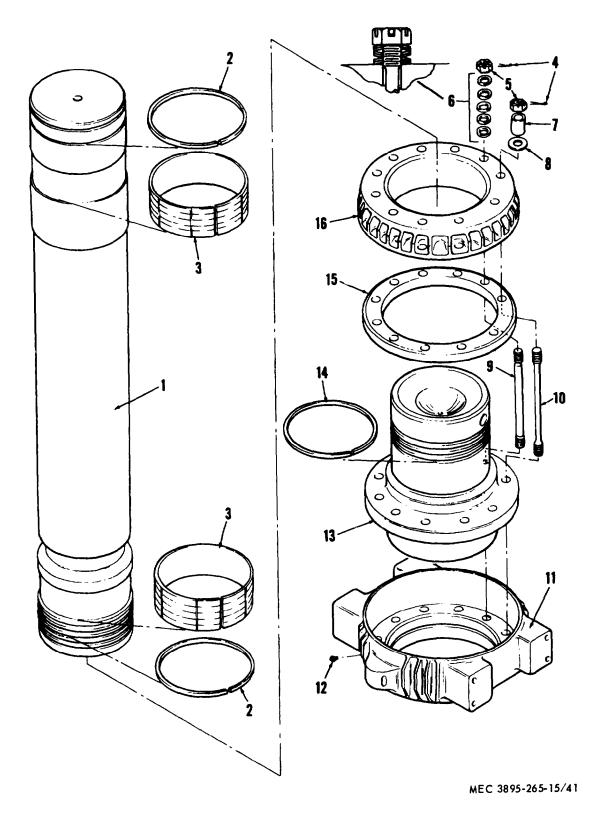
Ram, anvil, and recoil dampener, exploded view.
